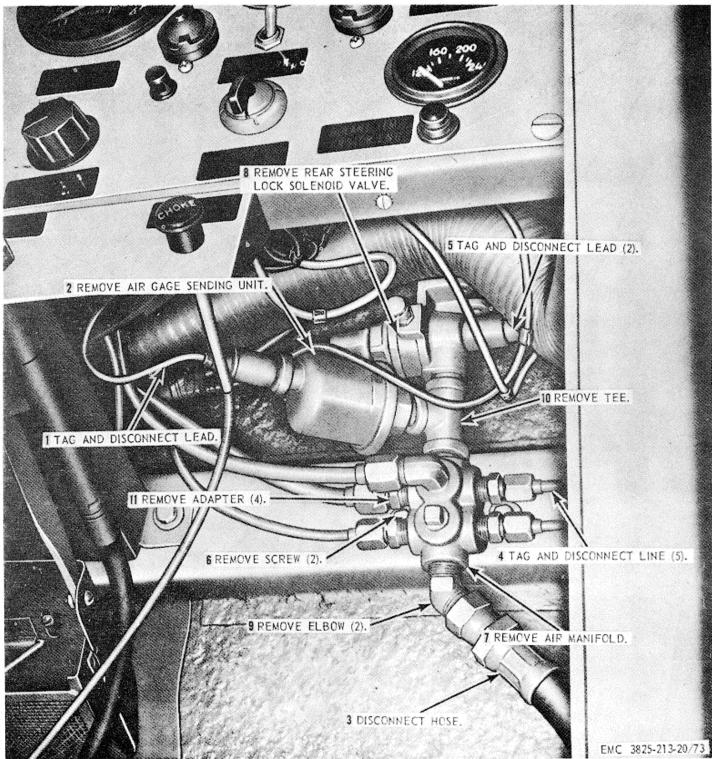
Air gage sending unit, rear steering lock, solenoid valve, and air manifold, removal and installation.
